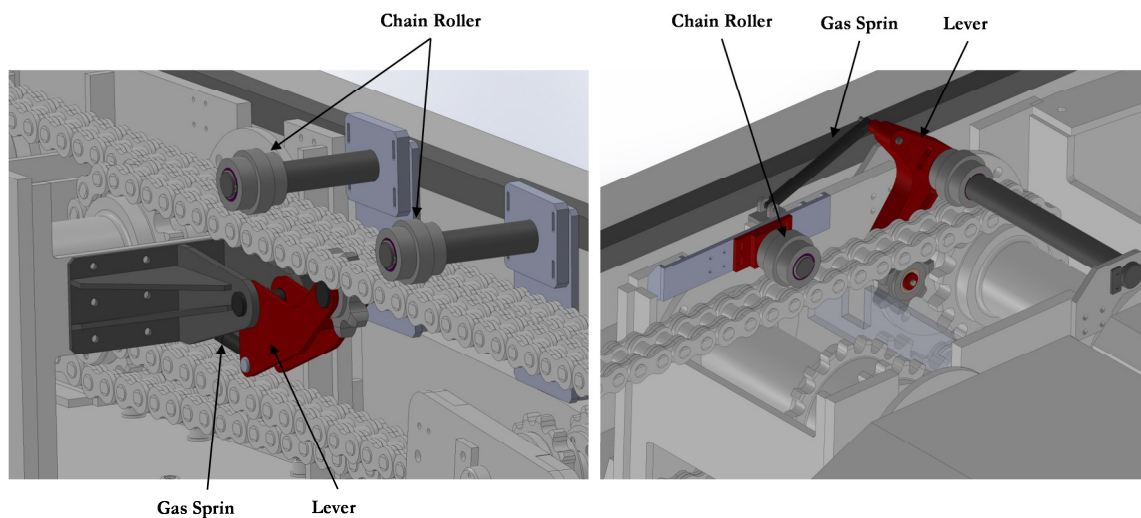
Lower Take-up (left) and Upper Take-up right
